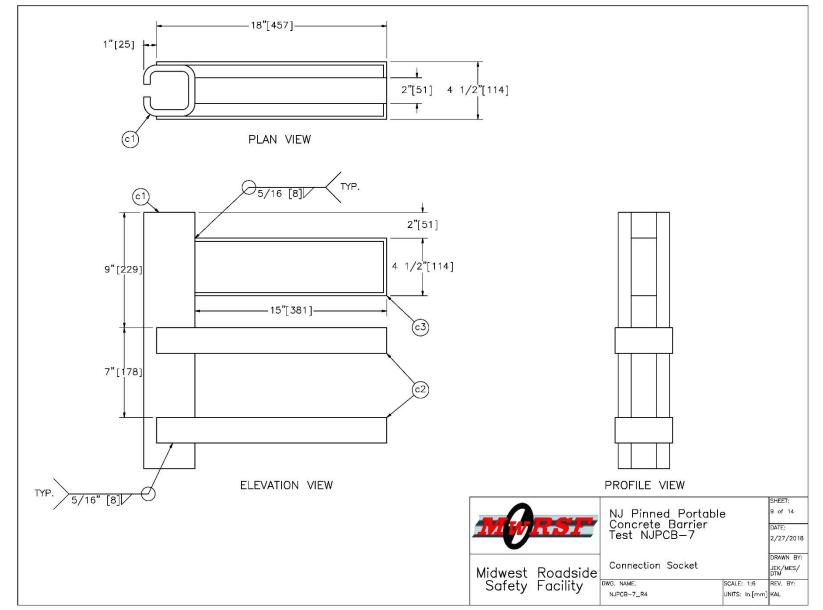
PCB Connection Socket Details, Test No. NJPCB-7
